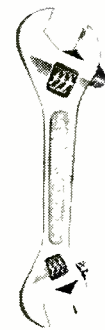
Double-ended adjustable wrench presents two sets of adjustable jaws in different sizes. Tool shown is Diamond model DB78.
